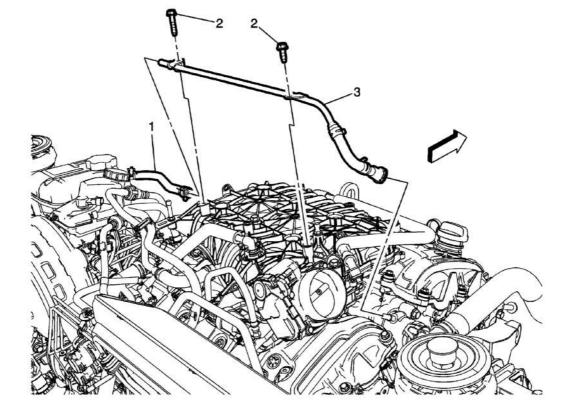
Engine Coolant Air Bleed Pipe (LFX) Courtesy of GENERAL MOTORS COMPANY
